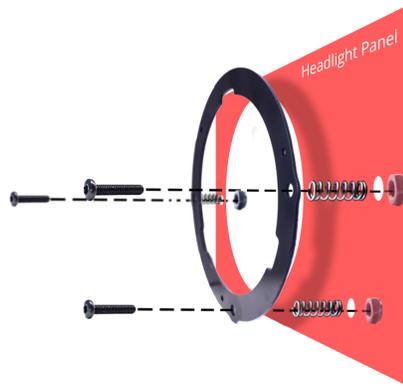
Insert a 1/4 x 1.5 in. screw through the mounting ring hole, then through one of the supplied springs and then into the headlight panel hole.
